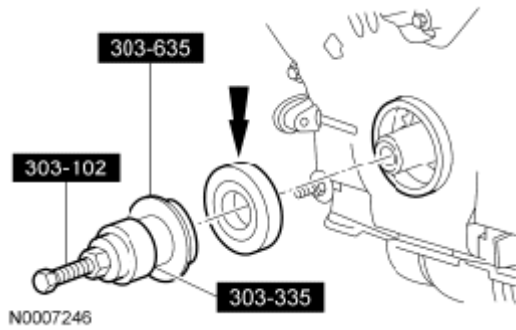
Installing Crankshaft Front Seal Into Engine Front Cover Using Special Tools
